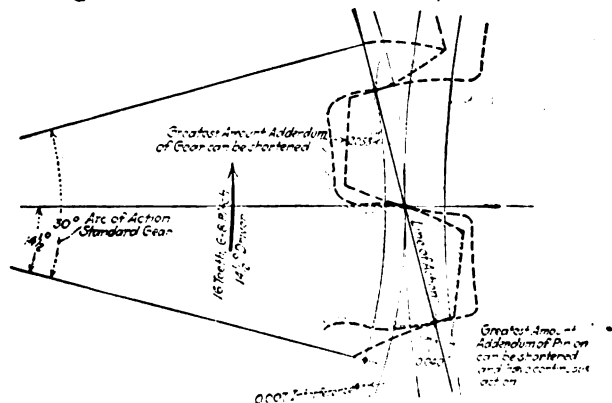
LAYOUT TO DETERMINE TOOTH LENGTH
